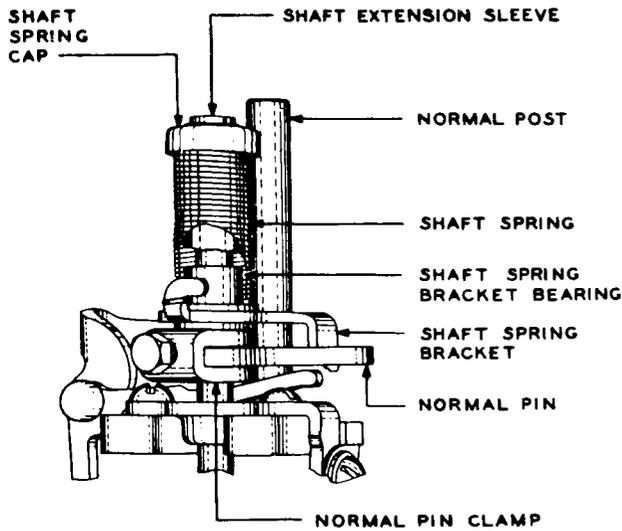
SHAFT SPRING AND ASSOCIATED PARTS
